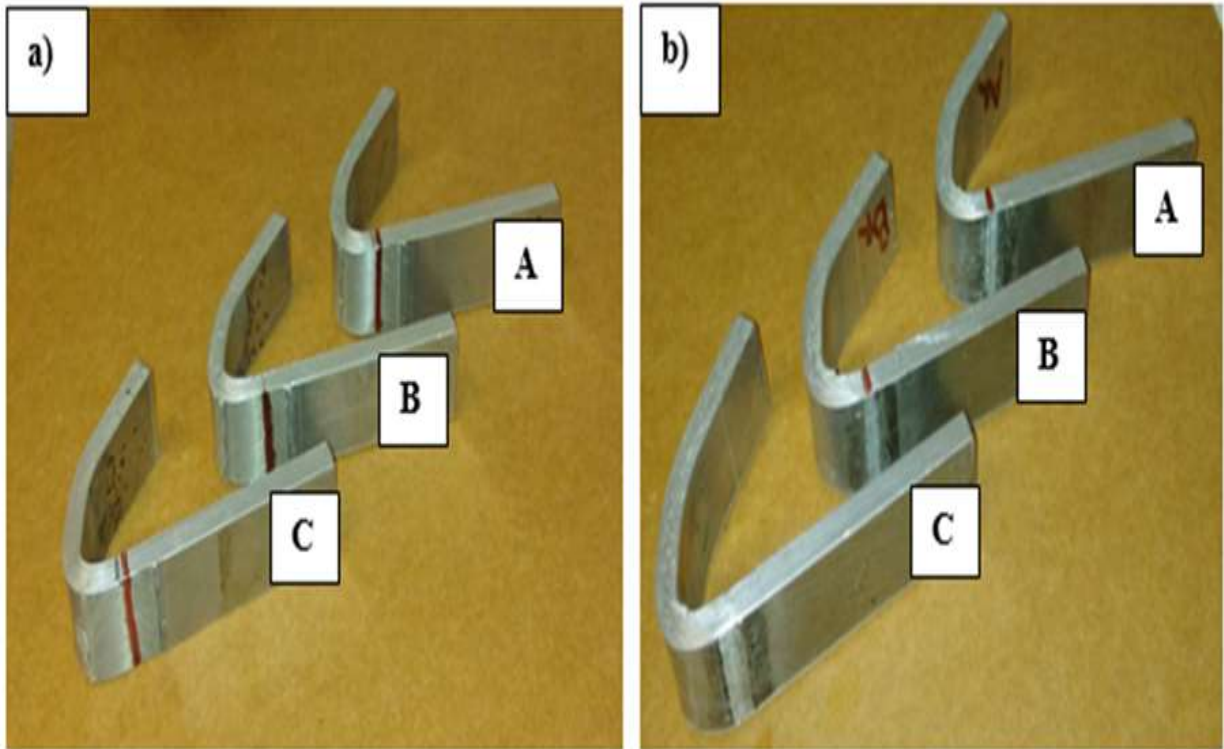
a) Tested bending specimen (face), b) Tested bending specimen (root)
